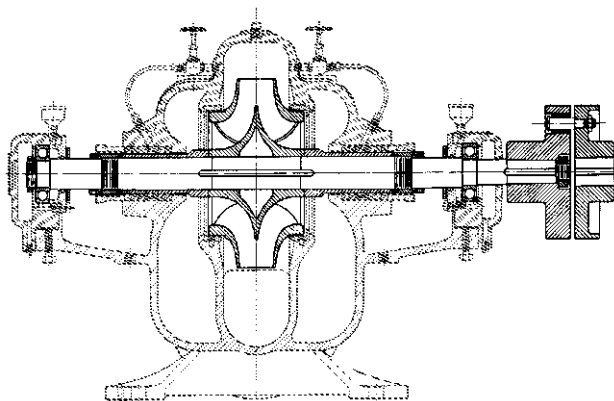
Rotor assembly of a single-stage, double-suction pump (Flowsolve Corporation)
